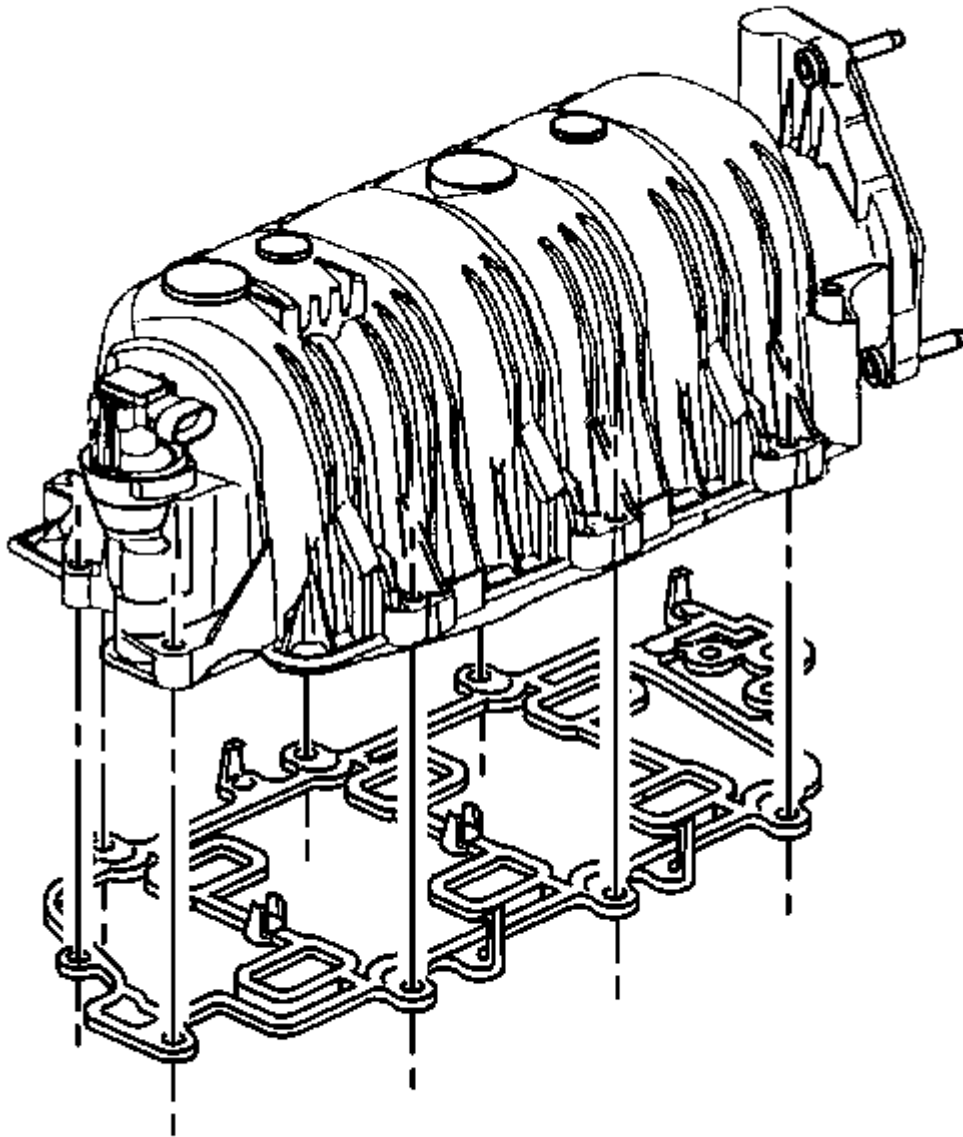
Removing Upper-To-Lower Intake Manifold Carrier Gasket
